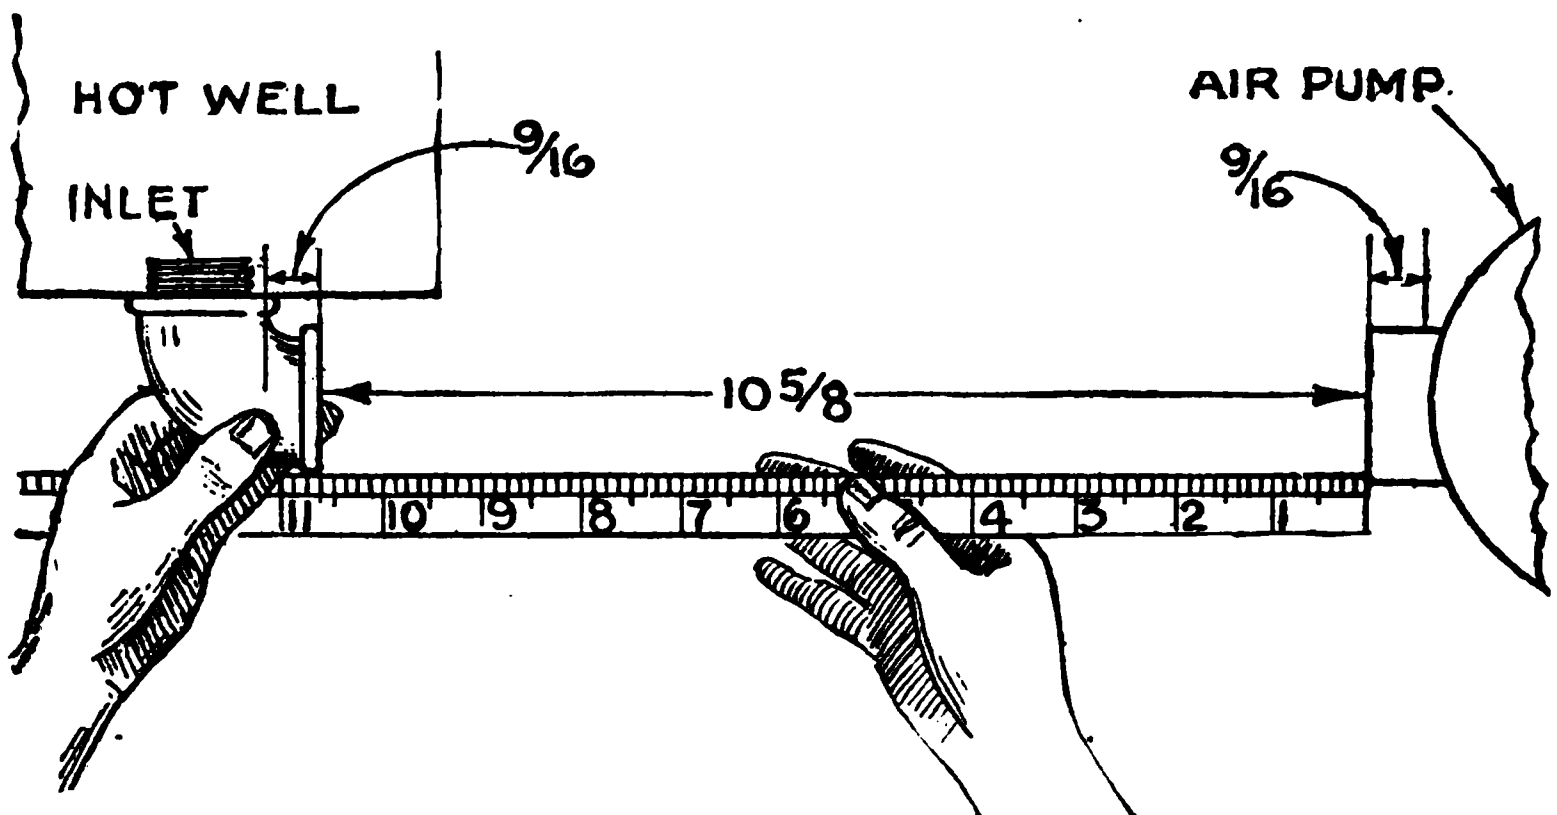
,306.—Detail of air pump connection to hot well showing method of measuring pipe length.
